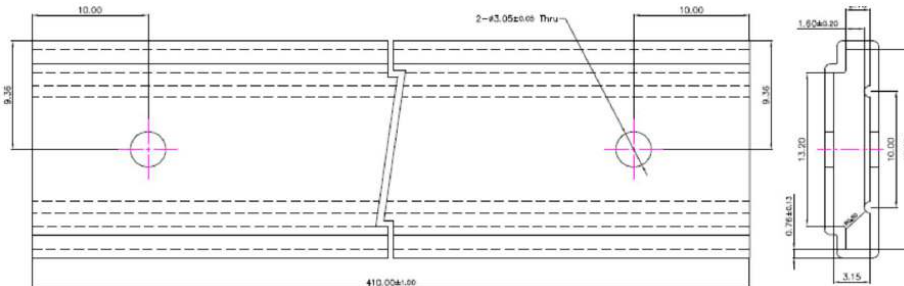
Tube dimensions for L2C5-xxxx1204E0900.
